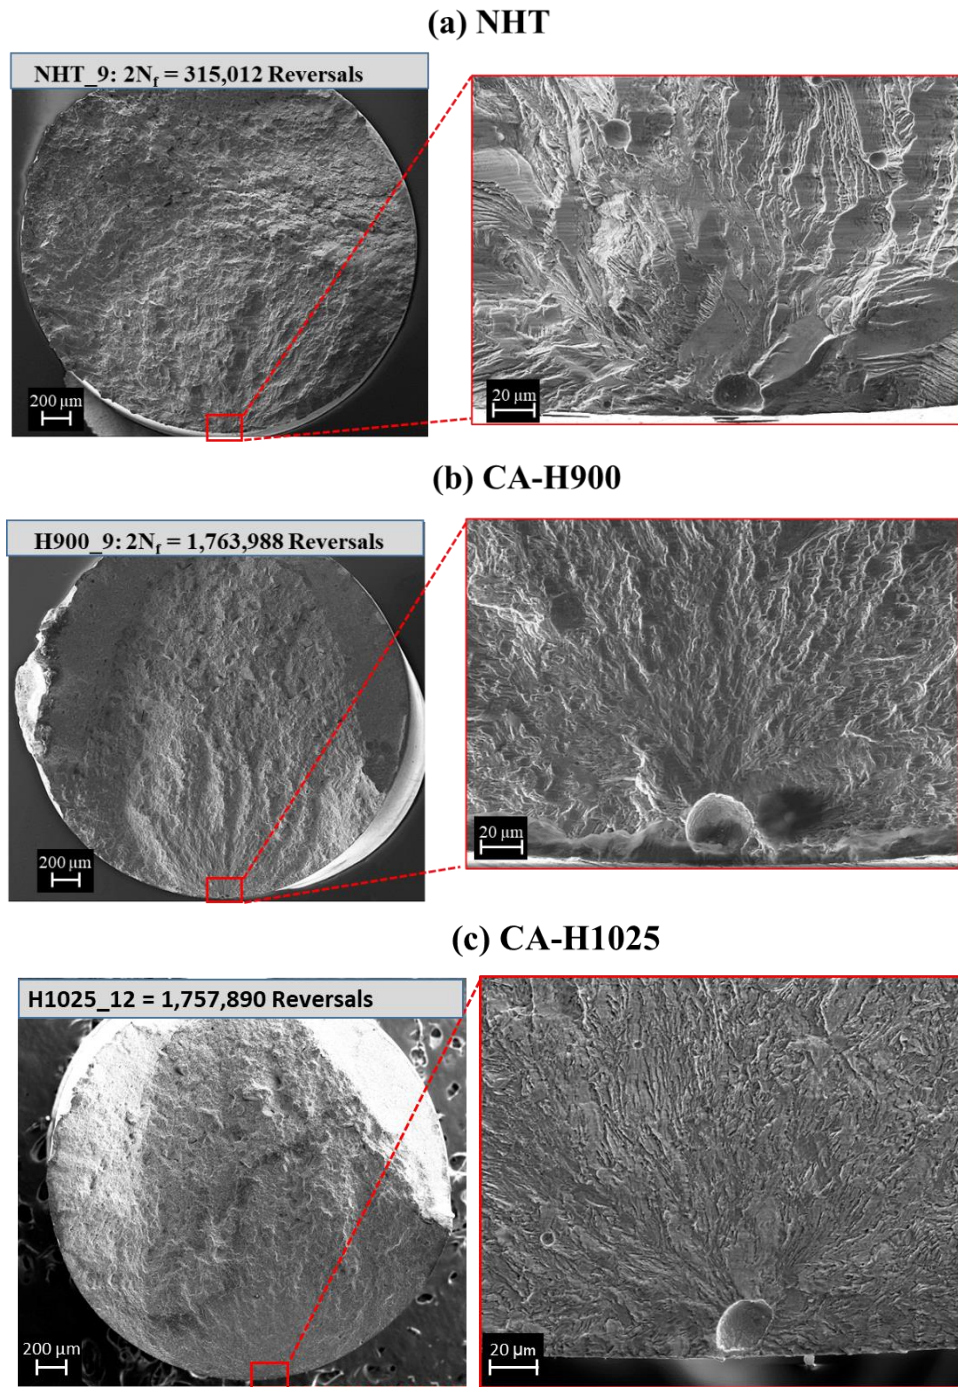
Fracture surfaces of L-PBF 17-4 PH SS specimens with uniform gage tested at 550 MPa: (a) NHT specimen with 315,012 reversals to failure, and (b) CA-H900 specimen with 1,763,988 reversals to failure, and (c) CA-H1025 specimen with 1,757,890 reversals to failure.
